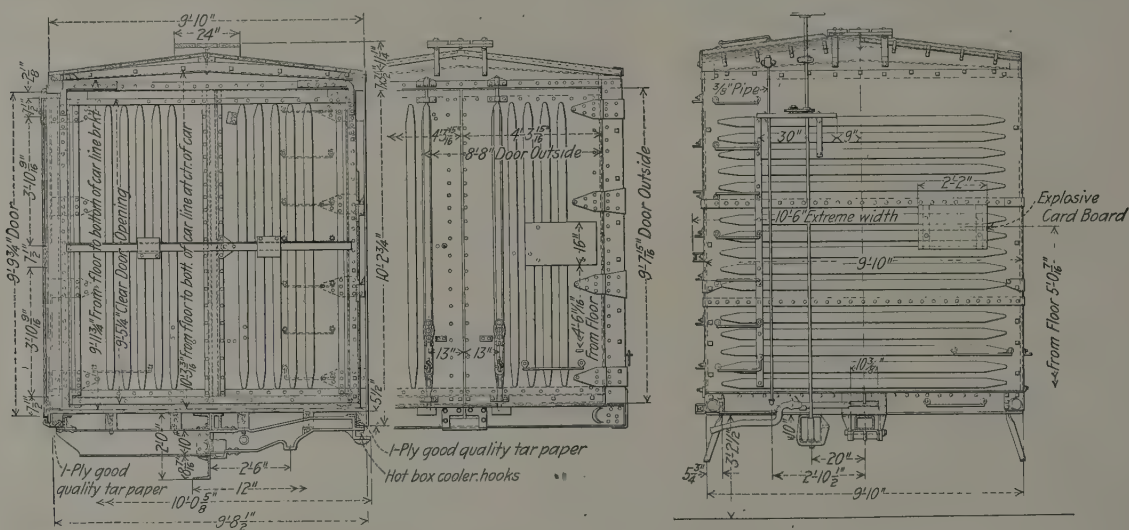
End Elevations. Automobile Car Shown in Figs. 45 and 46.
